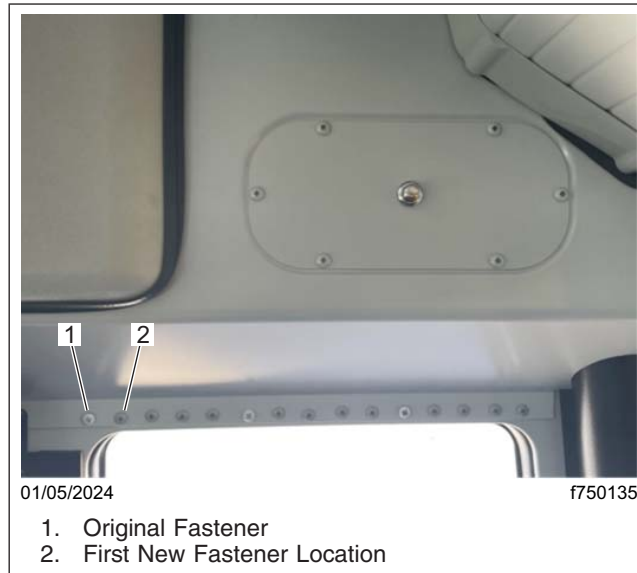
, Fastener Placement in the Rear Bulkhead Panel
